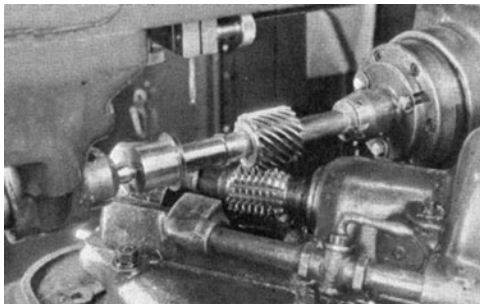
A tapered hob ready to finish cut a small helical gear. This picture shows the basics of gear hobbing.
